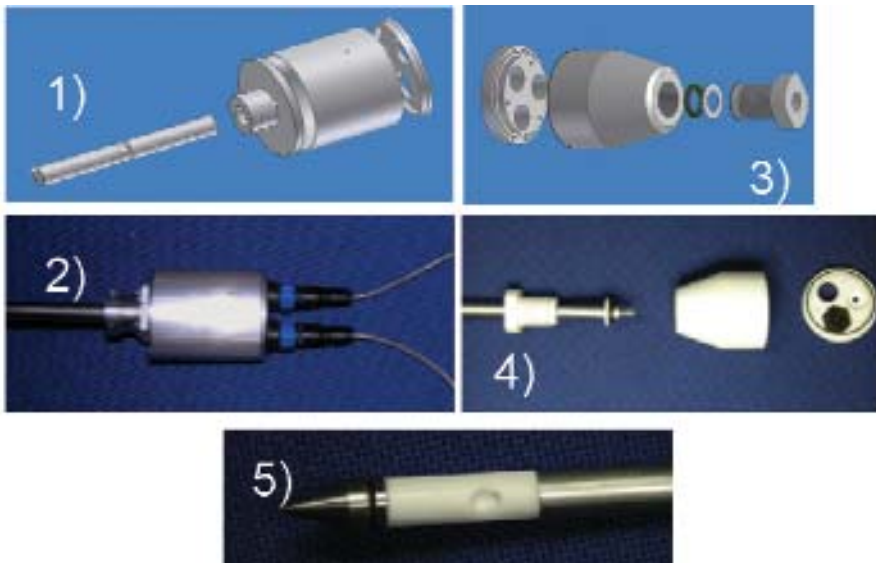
Mechanical design evolution. 1) 3D drawing of the head in aluminium. 2) aluminium head prototype. 3) 3D drawing of the Teflon head. 4) disassembled Teflon head. 5) disassembled gradiometer apex.
